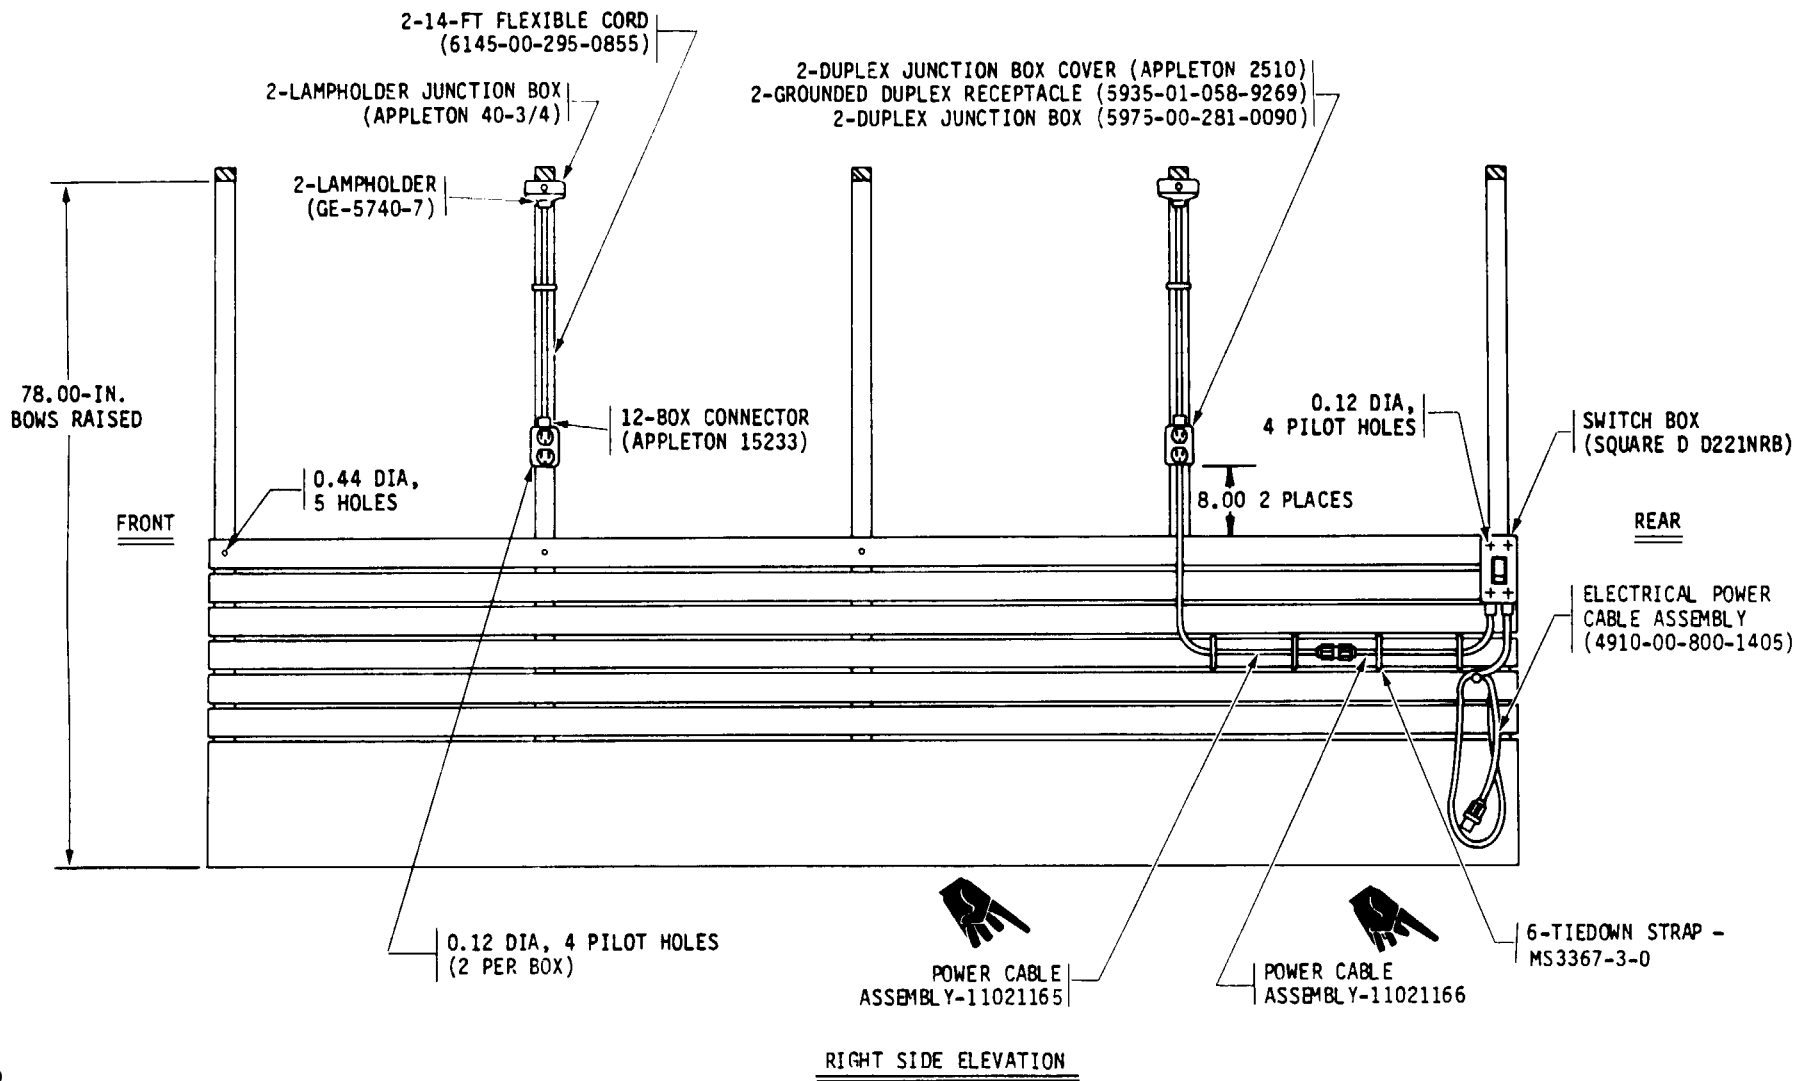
Electrical Components to be Mounted, Units 2 and 3, M35A2, Right Side Elevation.
